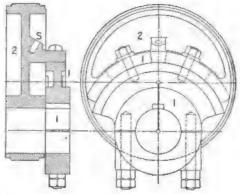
Adjustable Eccentric, Clamped upon Fixed Hub.
